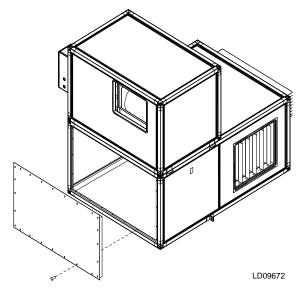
REMOVE COMPONENTS PRIOR TO REMOVING PANELS.
